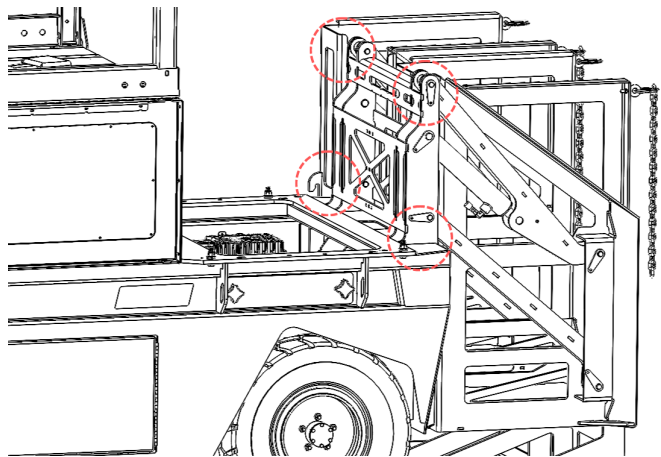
Edges And Corners Of The Bridge Plate Elevator.
